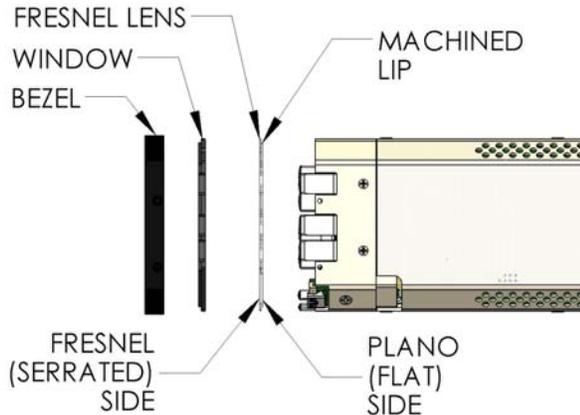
Place ST3400 unit onto a grounded bench area. Remove 8 ea 2-56 X .125 flat head machine screws securing bezel.
